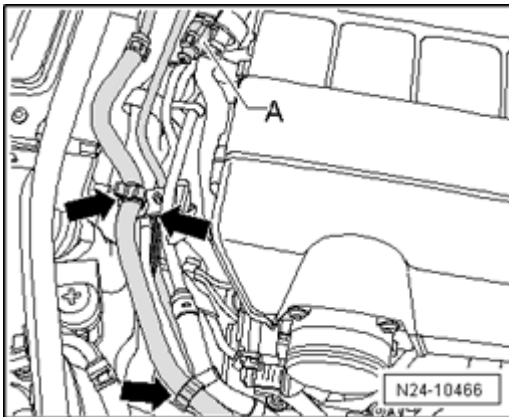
Removing Connector From EVAP Canister Purge Regulator Valve N80
